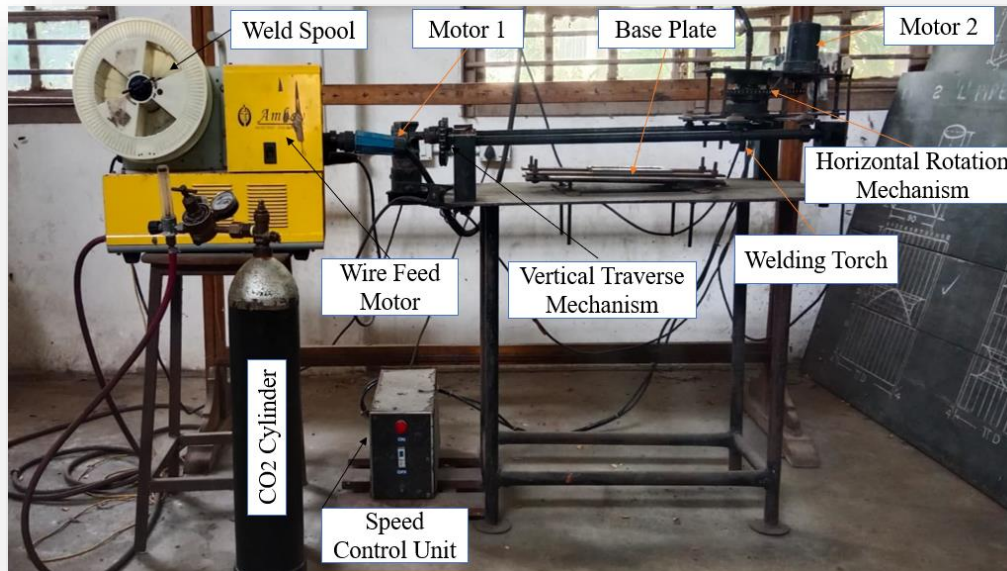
Typical Rotational Arc Welding Apparatus
